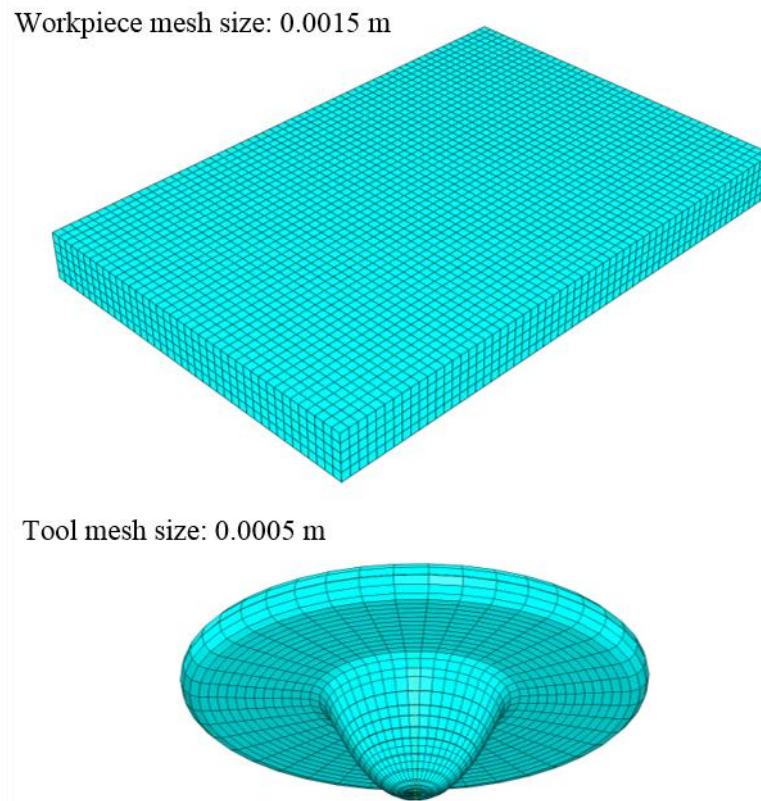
Element sizes of the workpiece and the tool used in all models.
